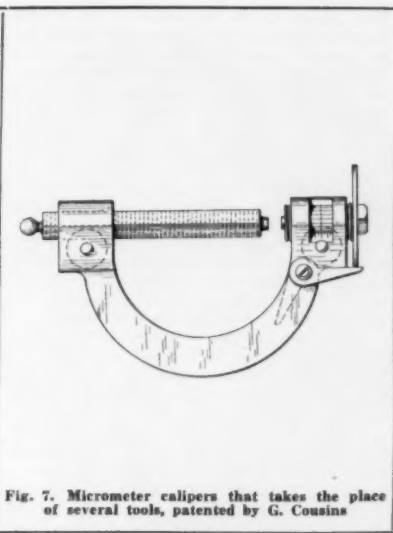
Micrometer calipers that takes the place of several tools, patented by G. Cousins
